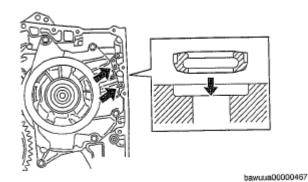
Locating Gaskets Of Transaxle Case Courtesy of MAZDA MOTORS CORP.
